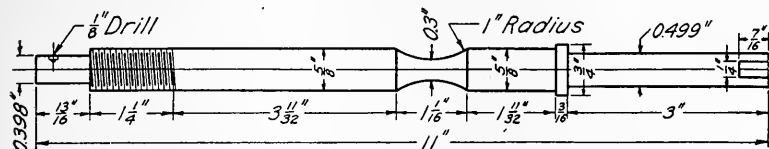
Specimen for combined reversed flexure and steady tension.
